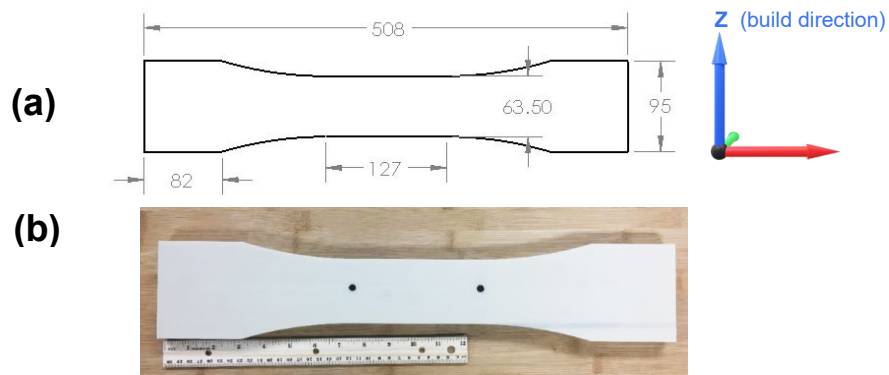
Large tensile specimen dimensions (mm), thickness of 19 mm (a) Image of harvested tensile specimen (b) Image of harvested tensile specimen
